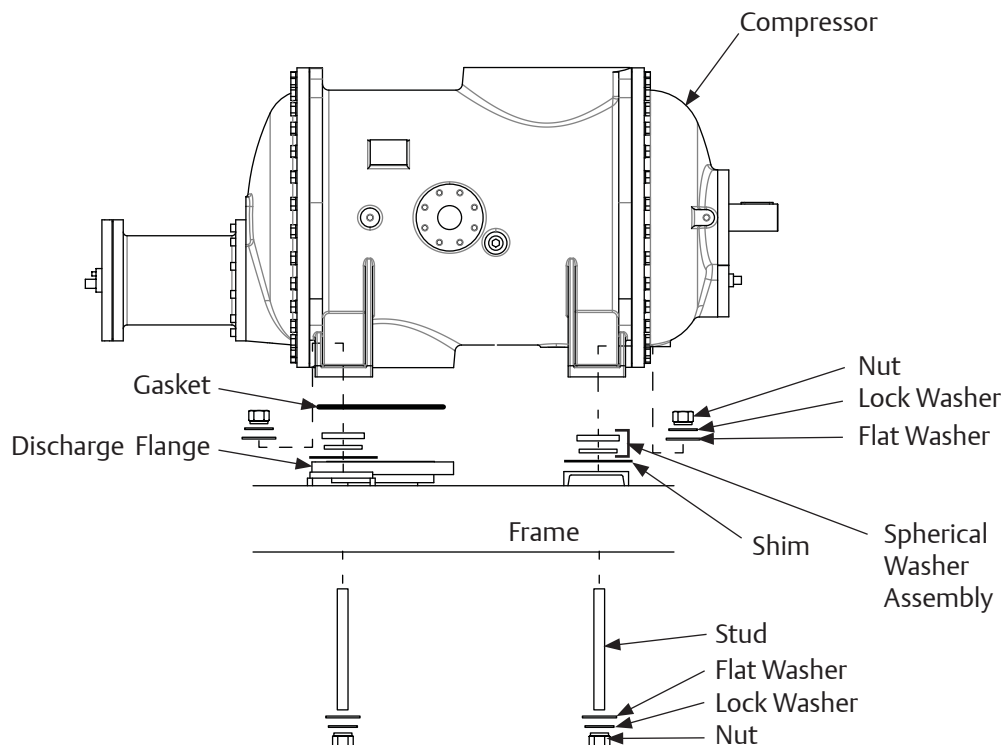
Compressor Replacement and Hardware Assembly (Model 3700 Shown)
